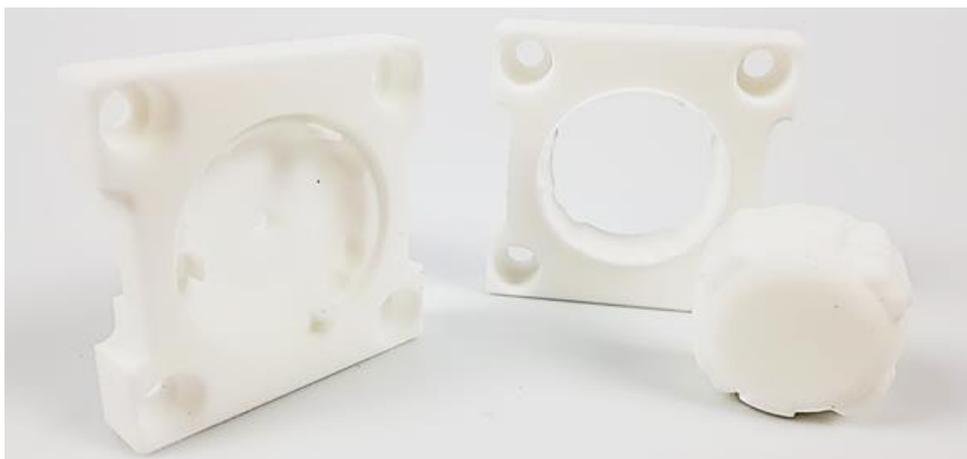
Flashing on injected molded part, the flashing is then trimmed with the help of a scalpel.
